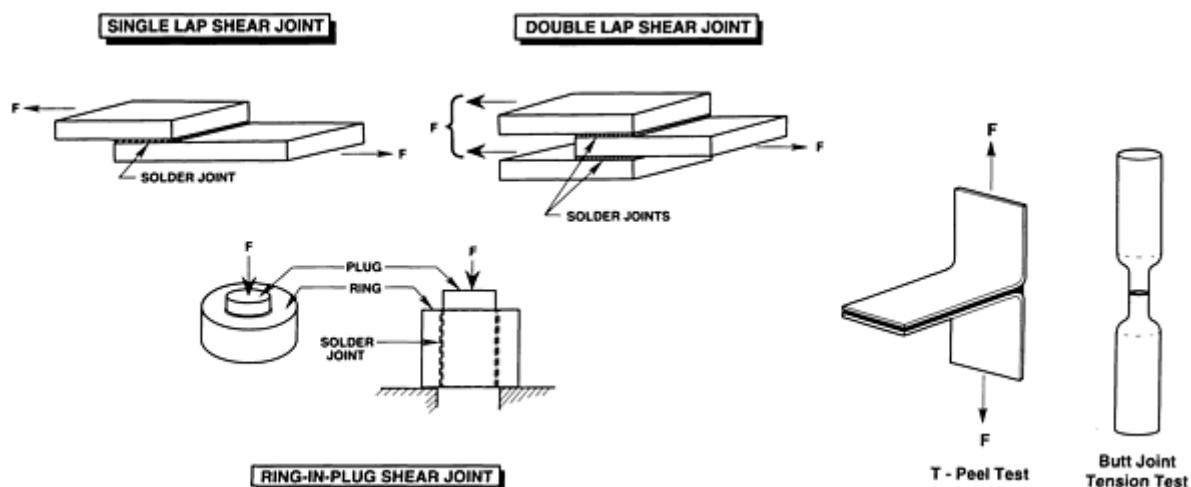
MECHANICAL TEST SAMPLE GEOMETRIES
